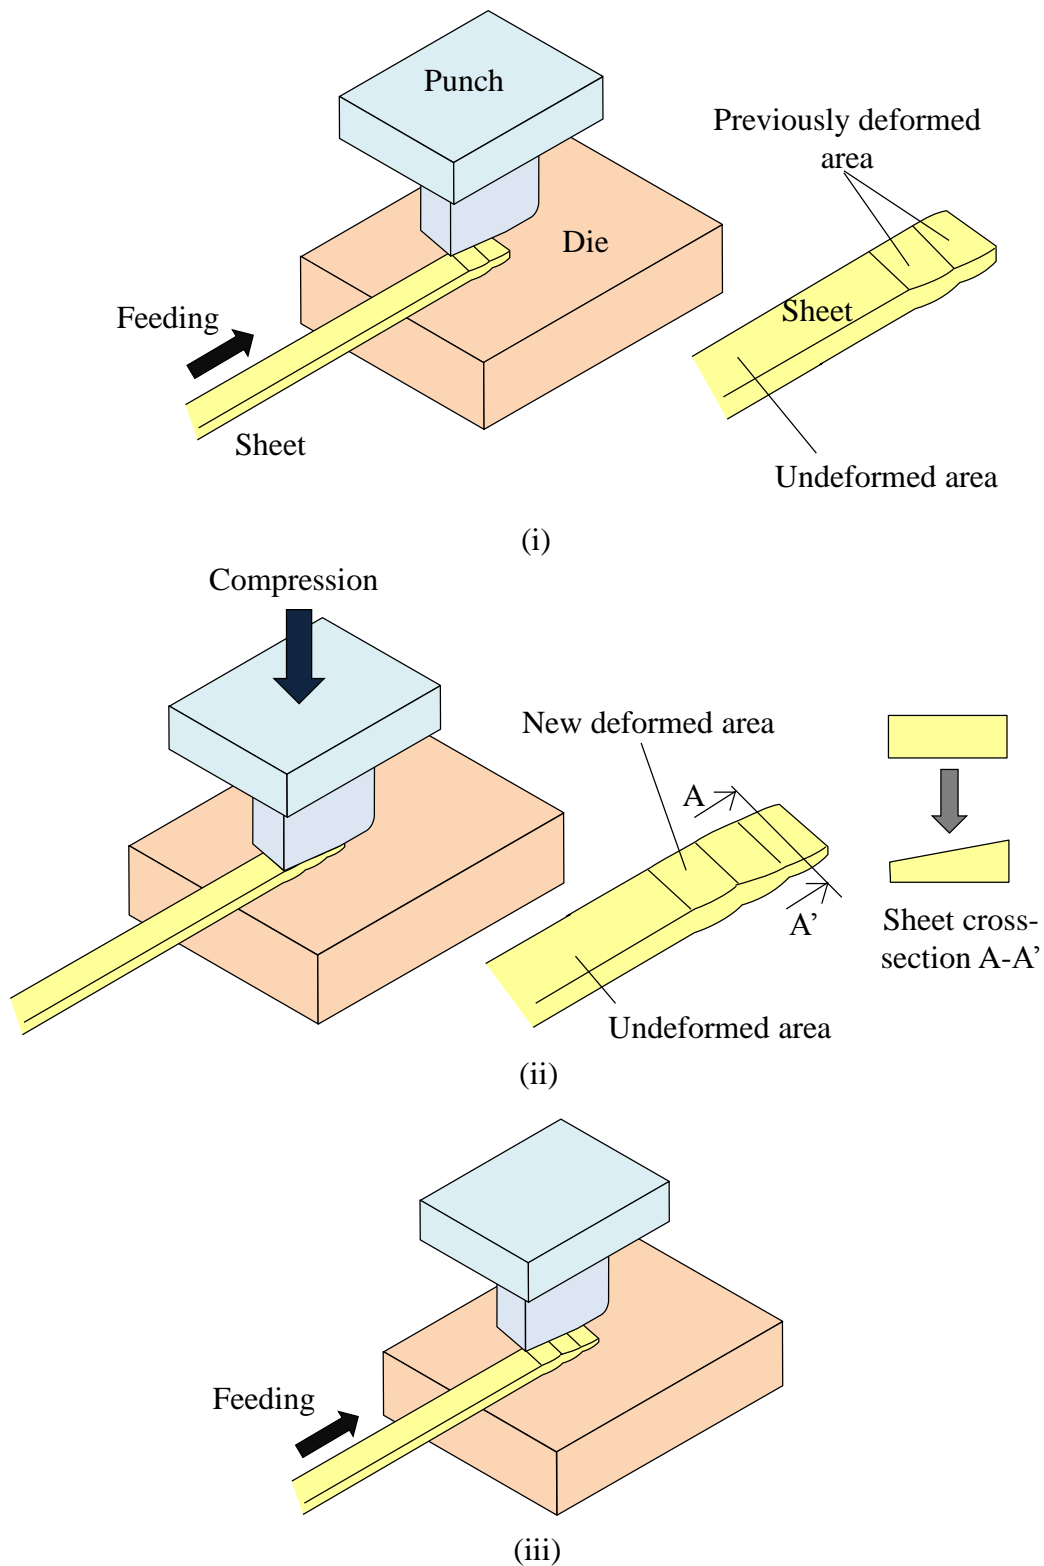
Steps in successive forging of long sheet having inclined cross-section.
